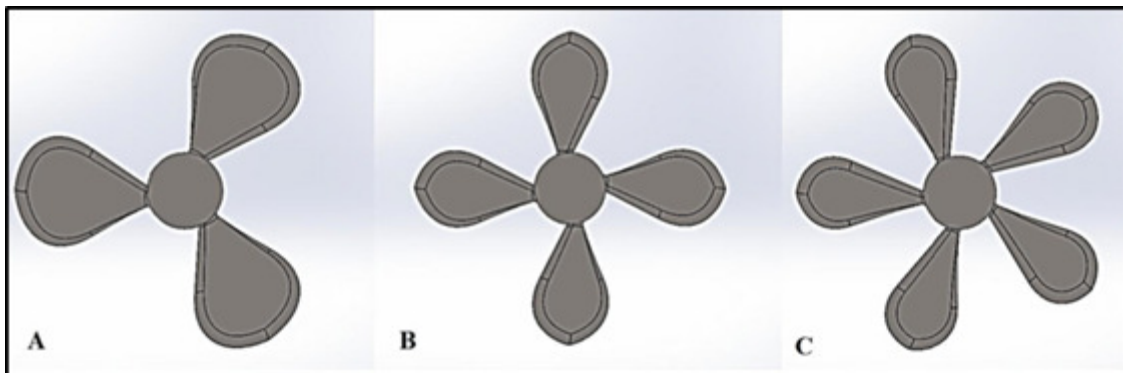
Front view of Propeller: A-3blades, B-4 blades, C-5 blades
